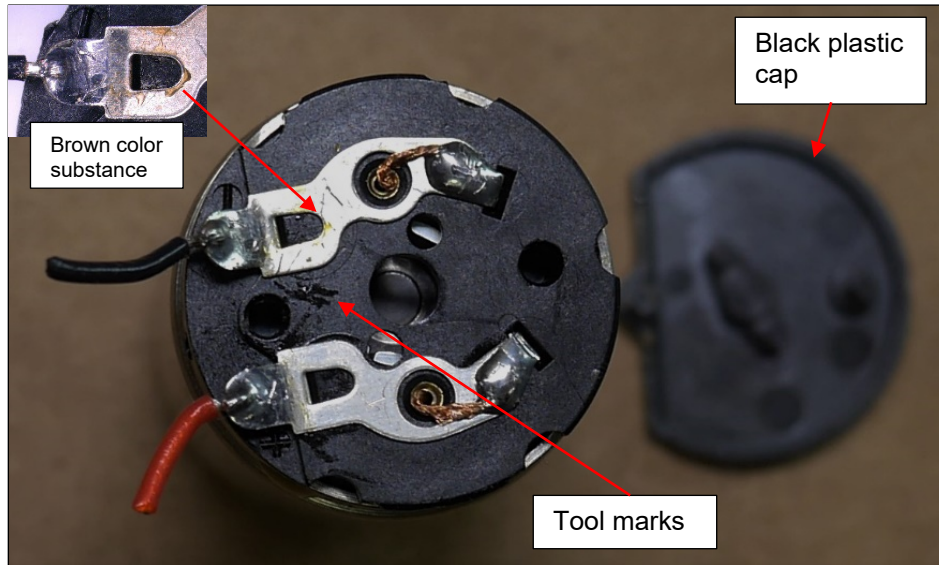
Black plastic cover removed from the rear section of the DC motor.
